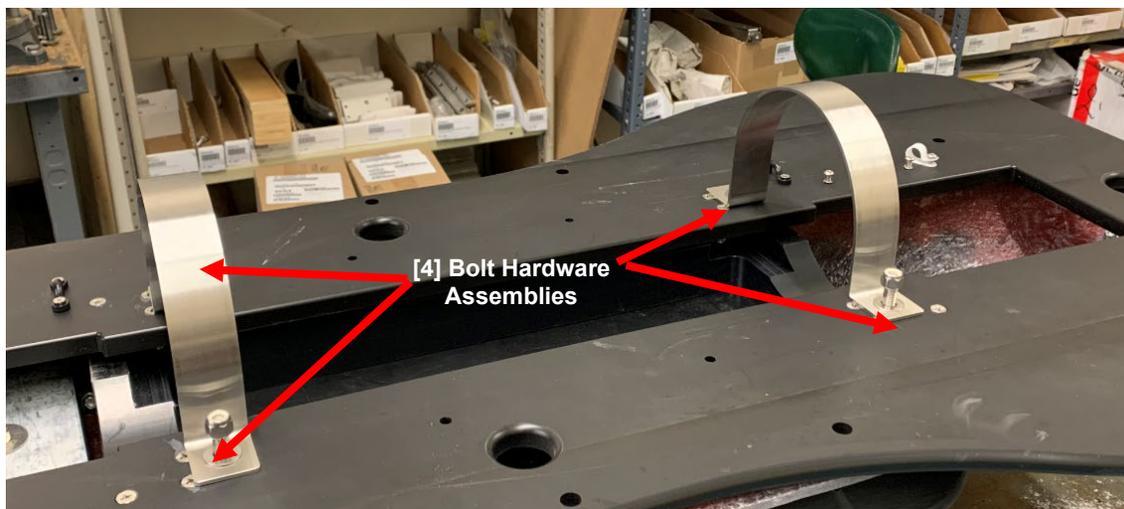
2050-DSS Sonar Processor Mounting Assembly
